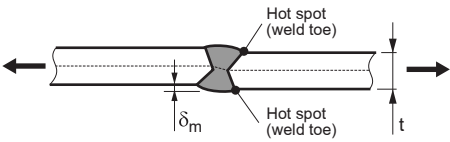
Butt weld without thickness transition with fabrication misalignment
